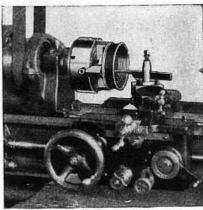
Cutting an Internal Thread on the 11-inch Lathe
